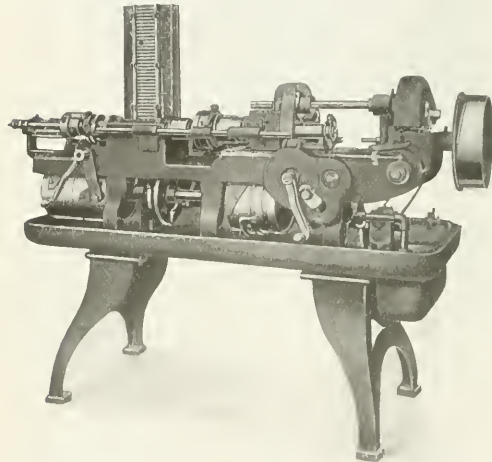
National-Acme Size No. 2, Style TM Stud Threading Machine
